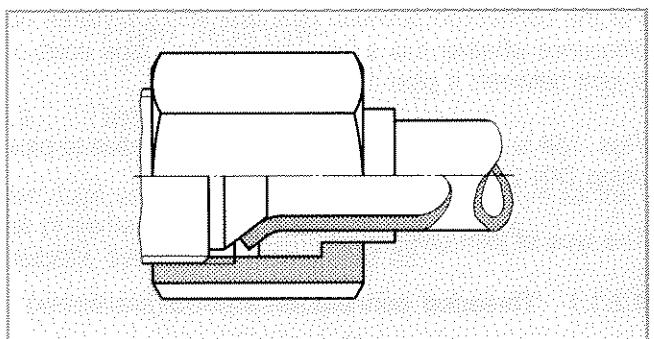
Flared joint, metal-to-metal seal, securing function by 37° flare, turned taper on body
